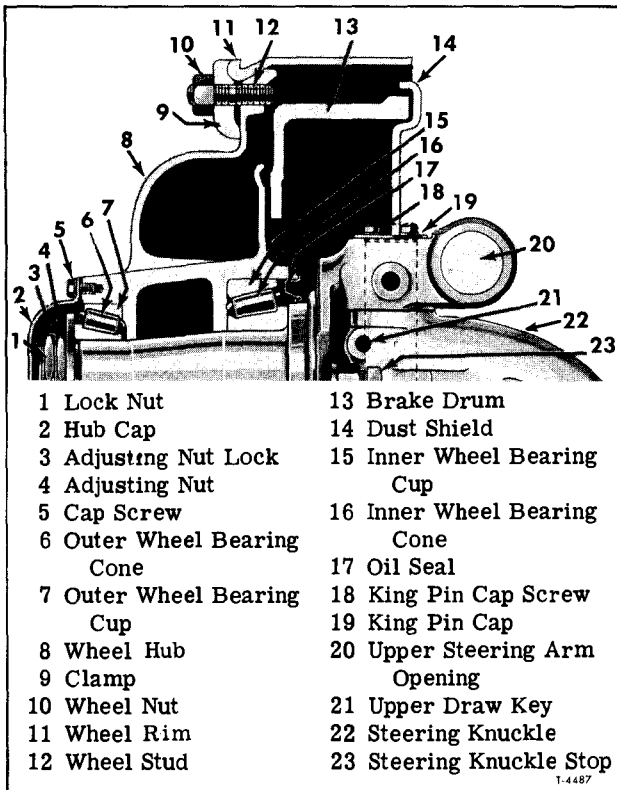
Front Hub and Bearing Assembly (FE970 Axle)
